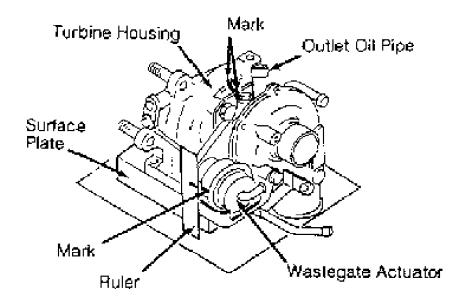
Marking Turbocharger Before Disassembly (MX-6 & 626) Courtesy of Mazda Motors Corp.
